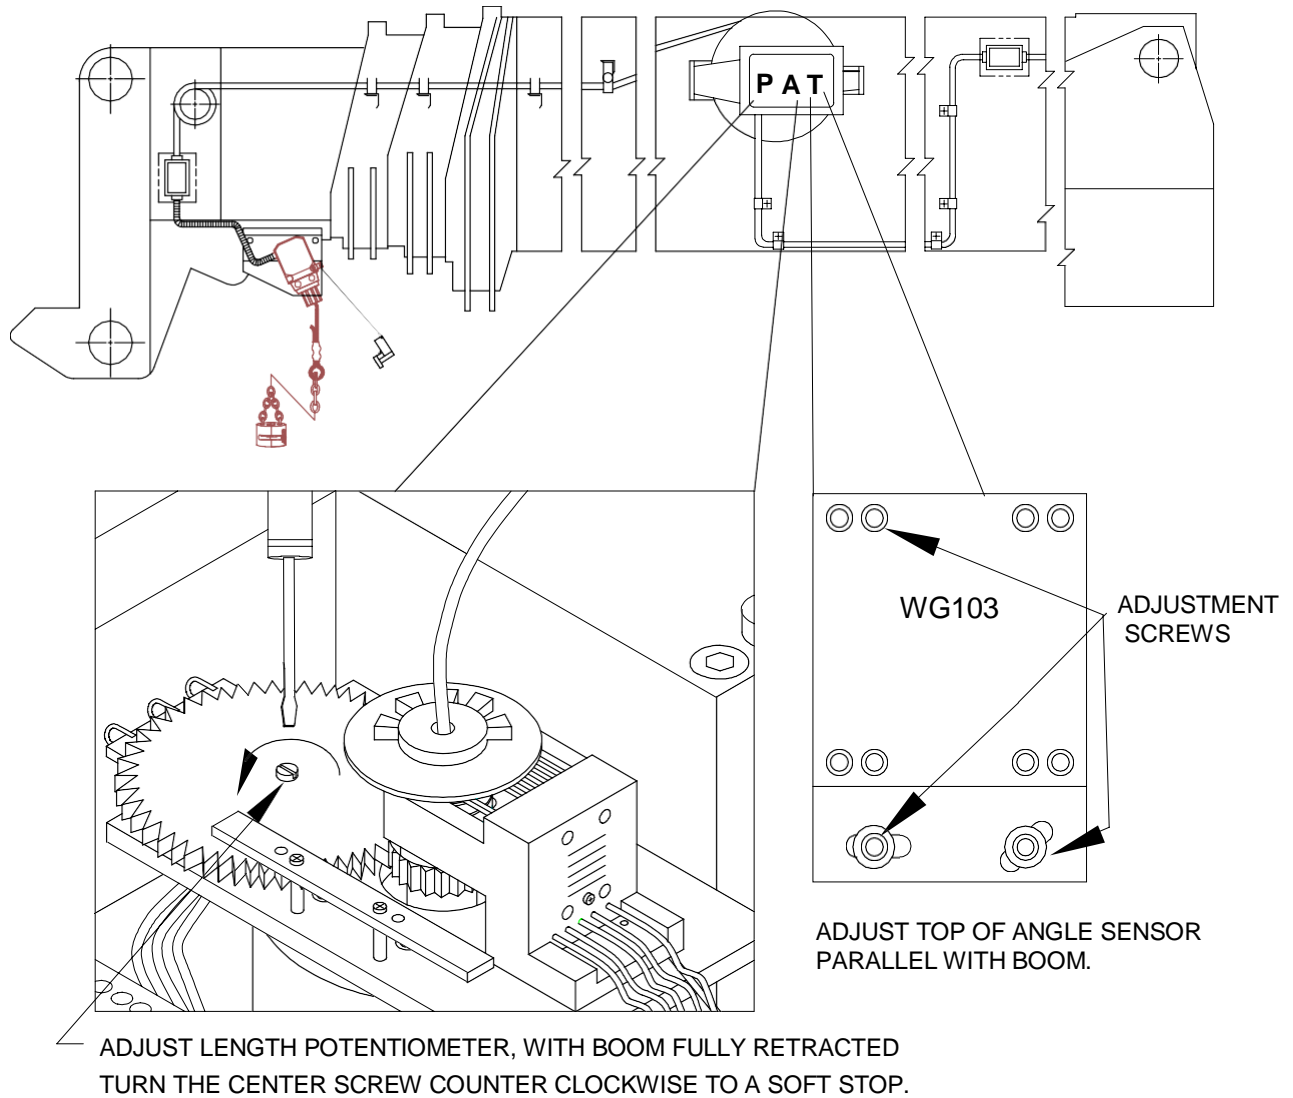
Hydraulic Boom Length and Angle Adjustments.
